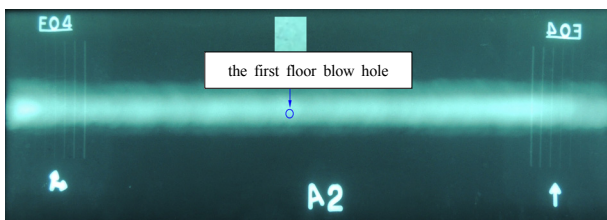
X-ray Radiographic test film of welding specimen to 4pass at CO₂ 100% in 20 L/min
